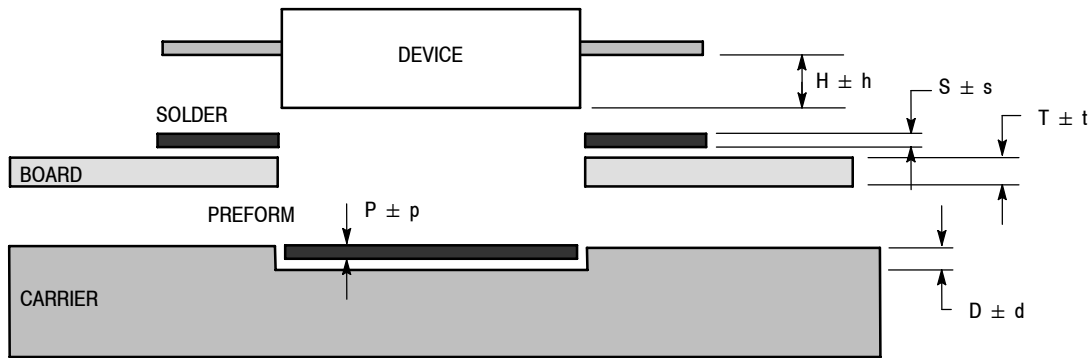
Exploded View Showing Criteria and Tolerances for Calculating Cavity Dimensions
